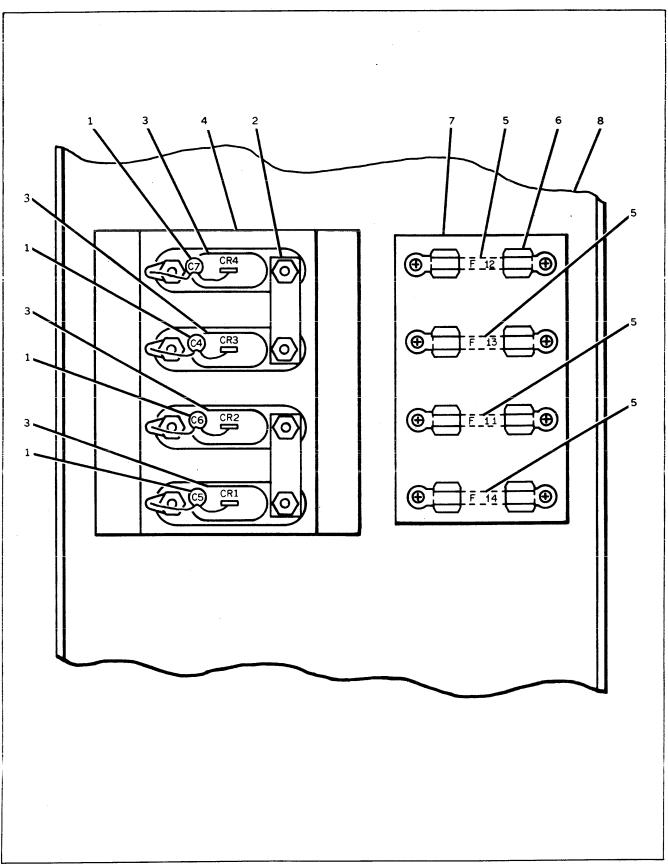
A304 Large Heat Sink Assembly, Parts Identification Diagram
